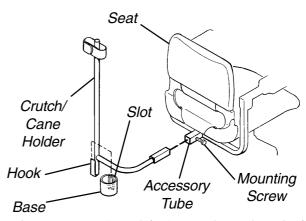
REMOVING/INSTALLING THE CRUTCH/ CANE HOLDER
